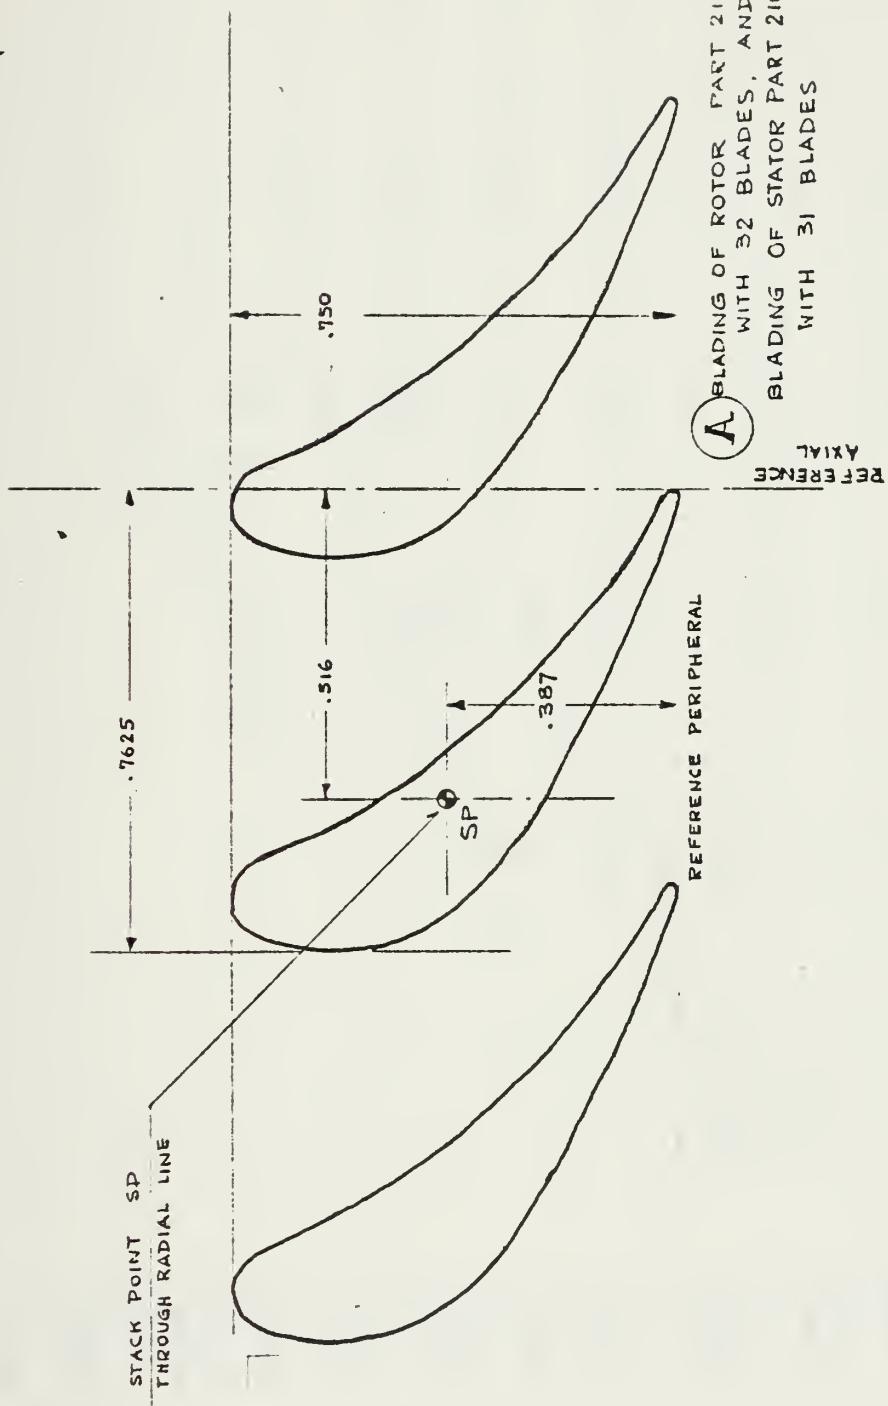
TURBINE ROTOR AND STATOR BLADE SHAPES
